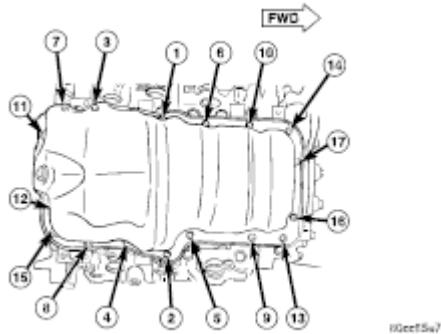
Identifying Removal & Installation Sequence Of Oil Pan Mounting Bolts
